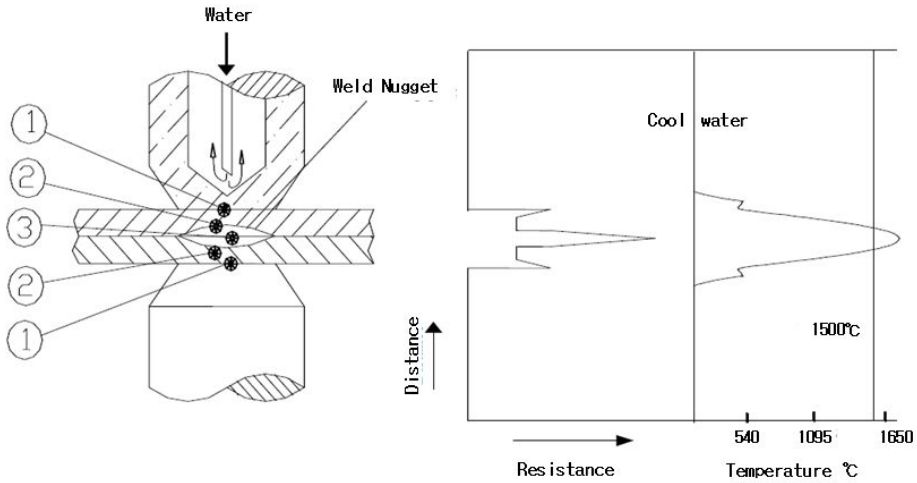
Schematic illustration of the spot welding process
